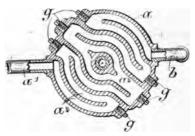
The Liquid Fuel Company steam omnibus. Horizontal section of burner.
